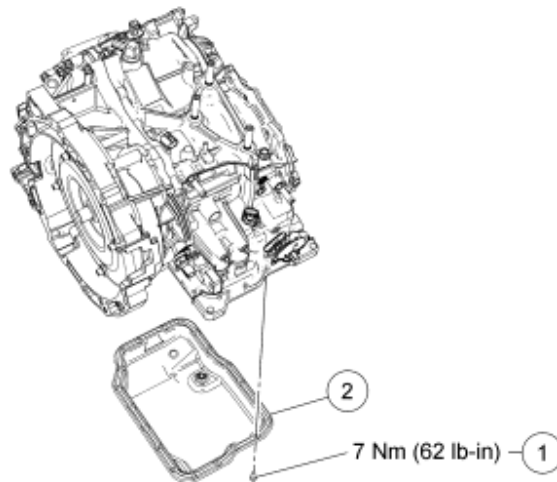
Exploded View Of Transmission Fluid Pan With Torque Specification
